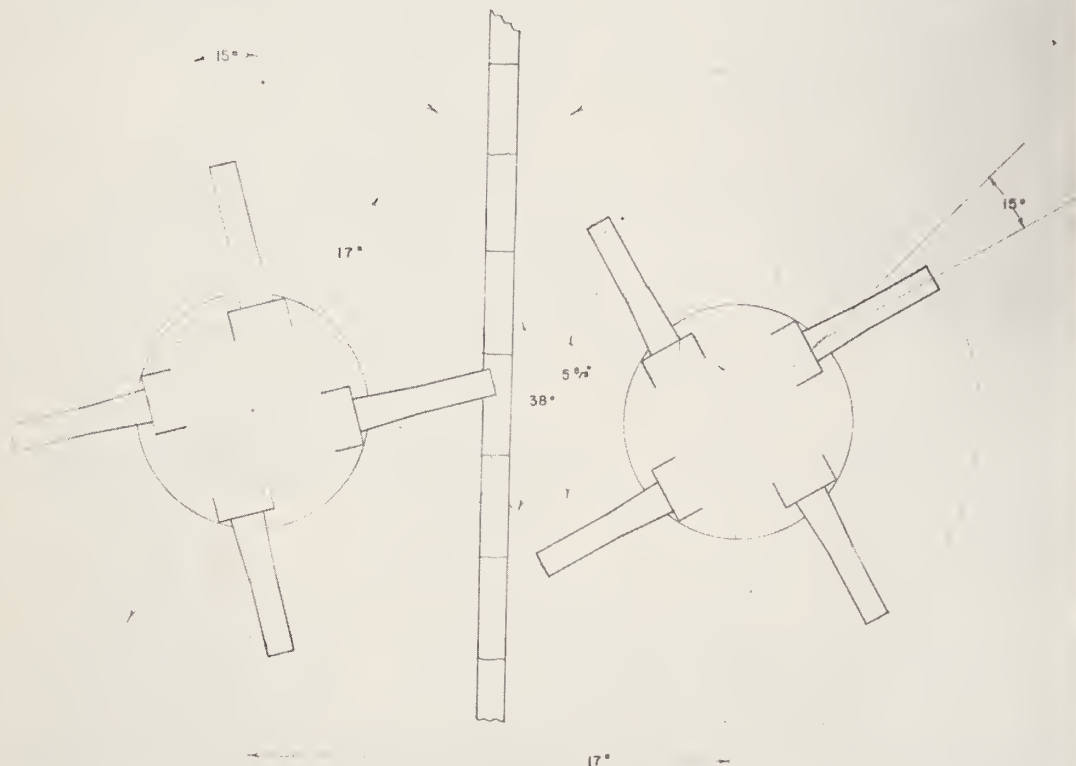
End view of lower stripper illustrating arc of contact and backward mounting of the rubber stripping fingers.
